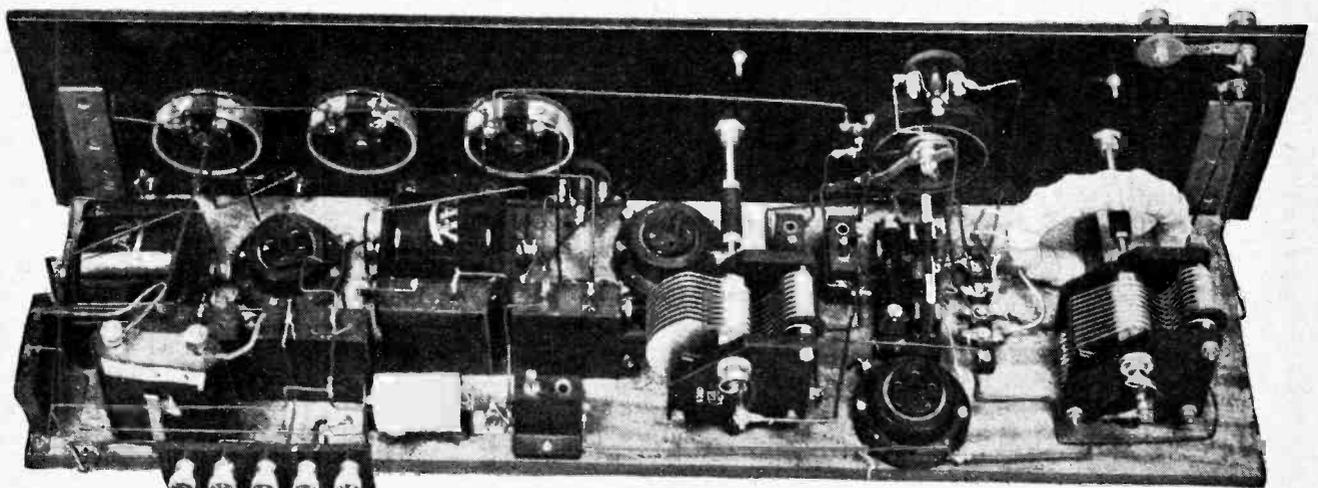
Plan view, showing condenser extension spindles and terminal strip for the combined coil L₁L₂.
